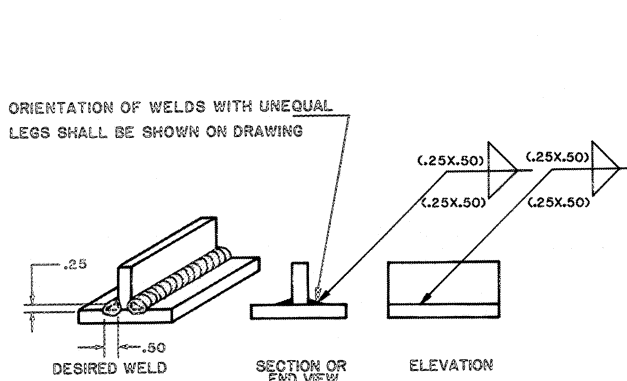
Application of Fillet Welding Symbols
